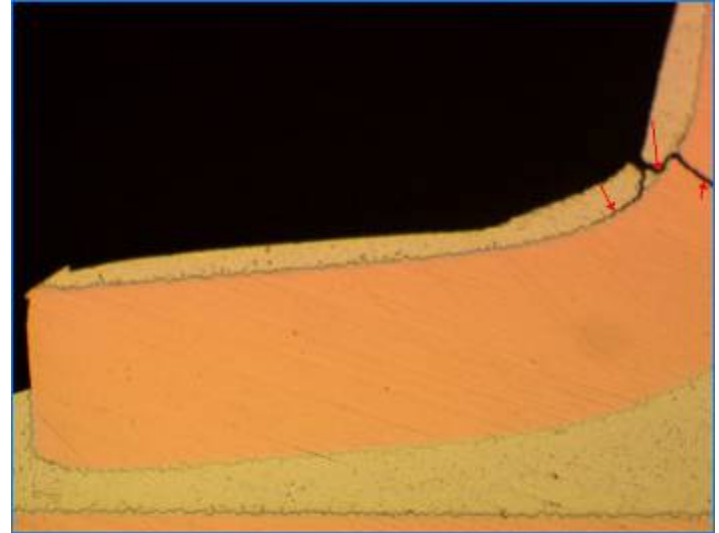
cross section, SN63, U41, left lead crack, 200xa
